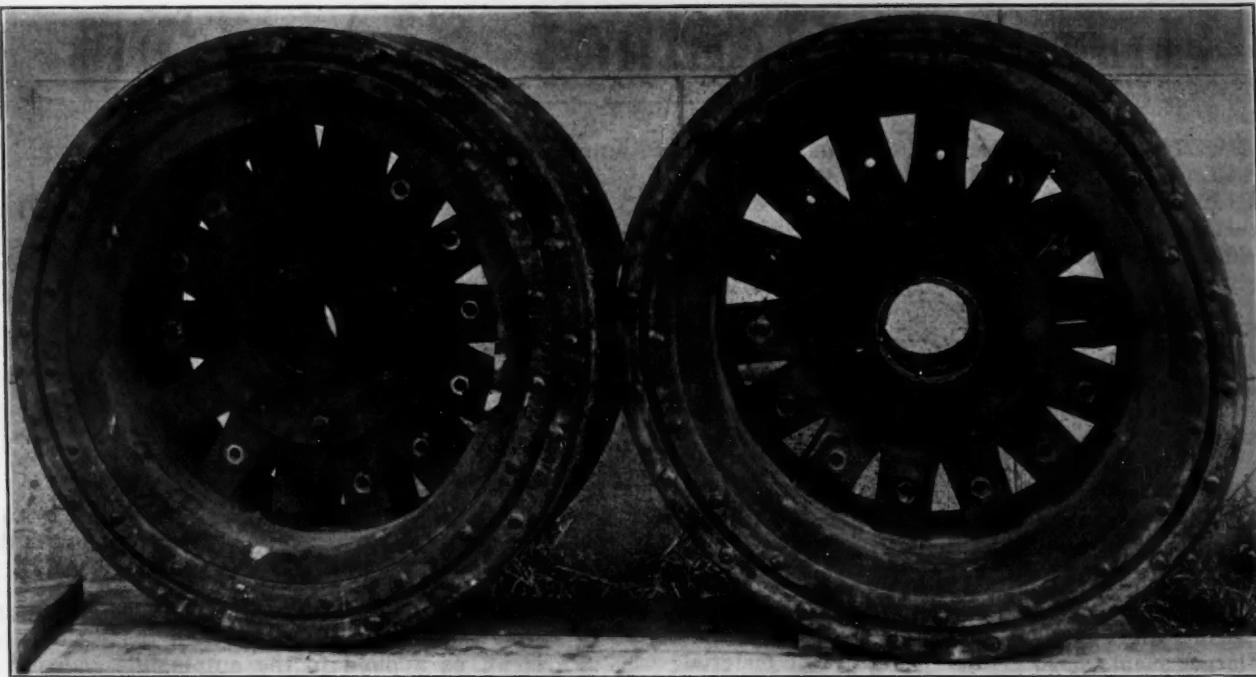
THE RUBBER CUSHION WHEEL AFTER UNDERGOING THE TESTS
